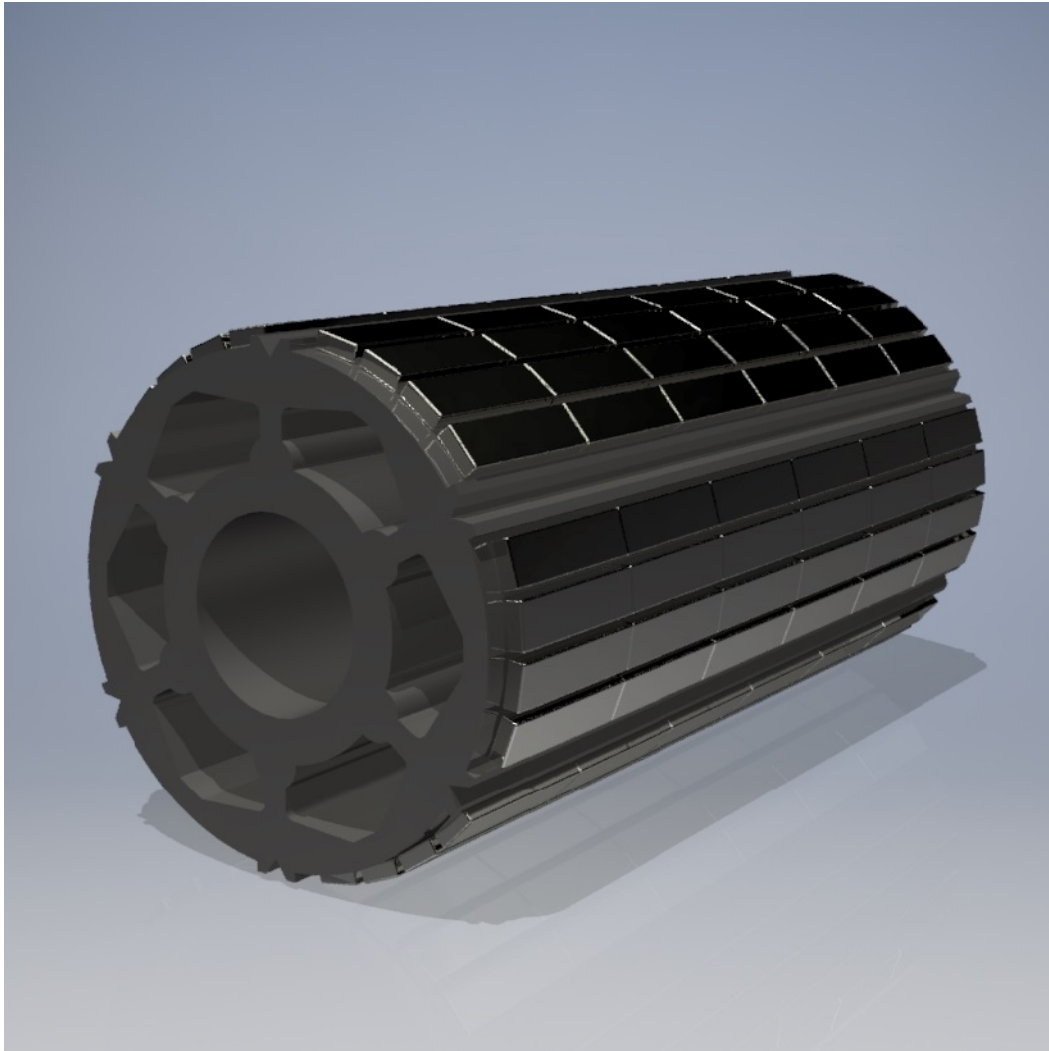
3-D CAD drawing of surface mounted permanent magnet generator rotor.
